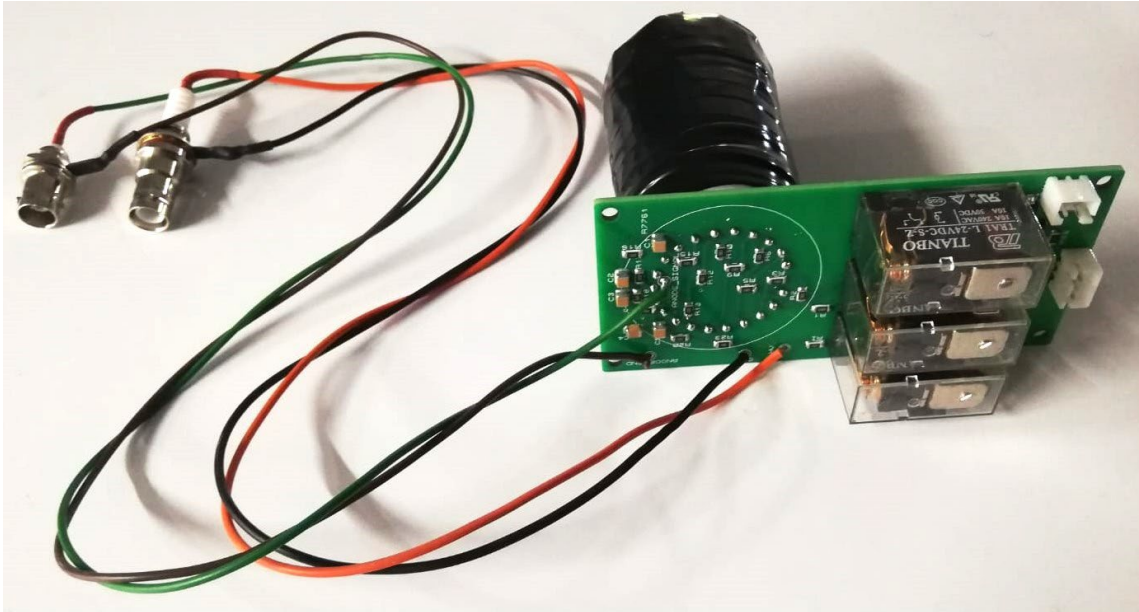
Image of the remote-controlled electronic board with all soldering and assembly processes completed.
